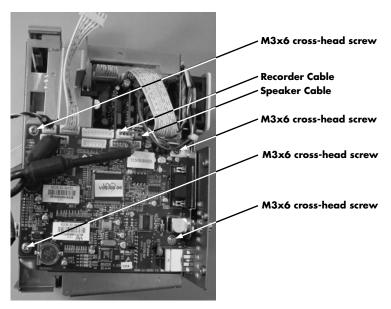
Unplug (2) two cable connectors and remove four (4) M3x6 cross-head screws.
